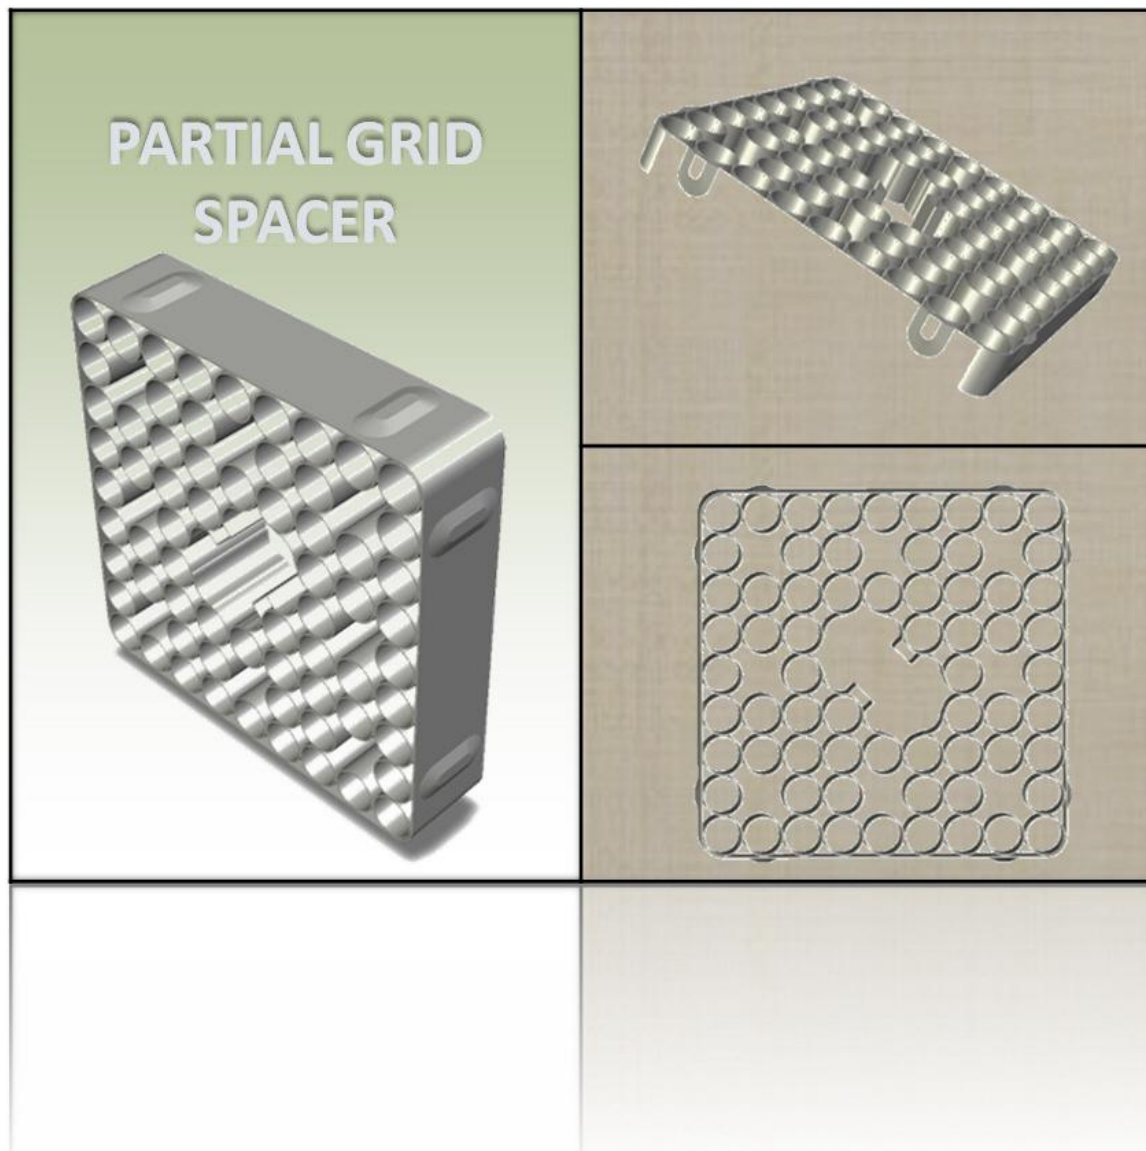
CAD solid model of assembly partially-populated spacer.
